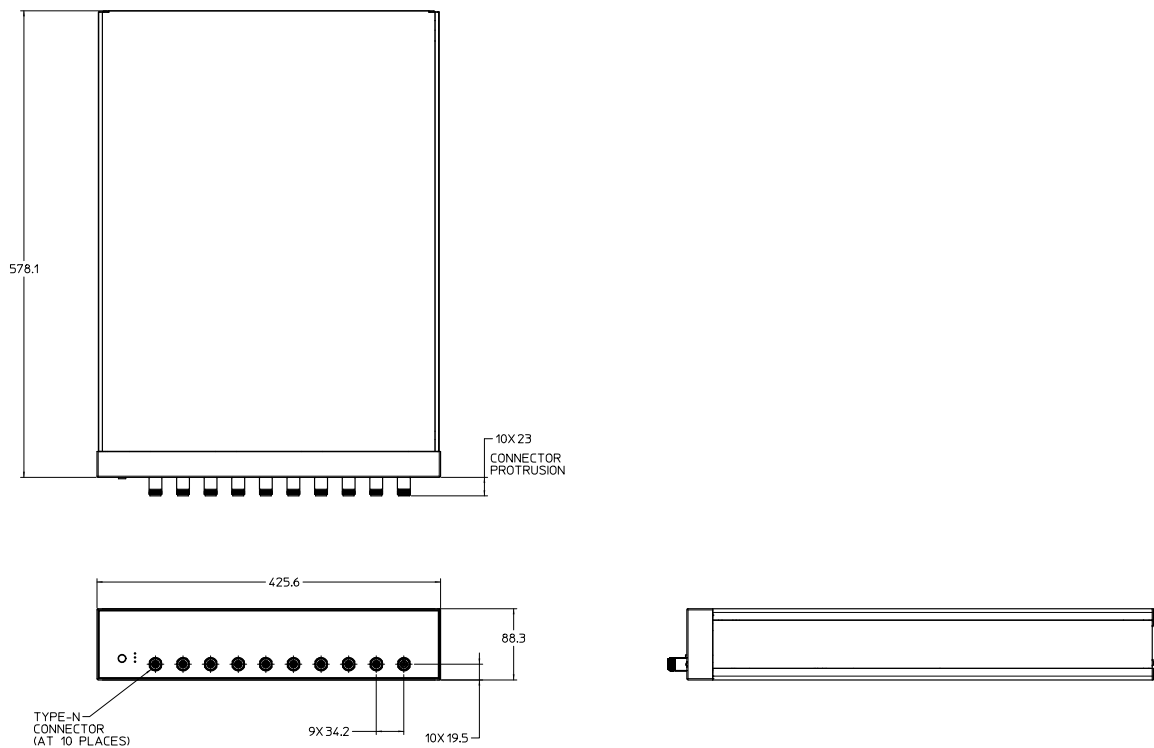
Mechanical dimensions of the J7205A/B with Type-N connector
